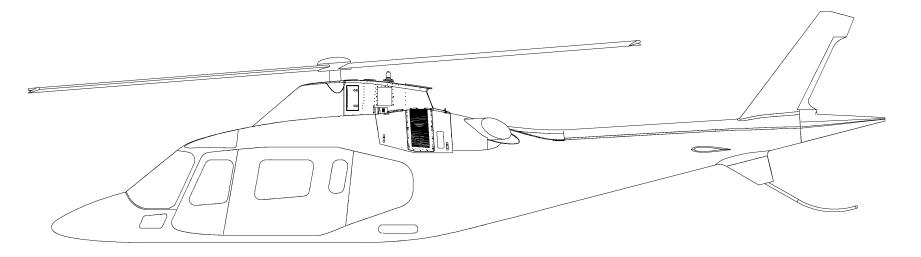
Fwd Electrical Kit (A/C Routing, Bracket, & C/B Details Locations)
